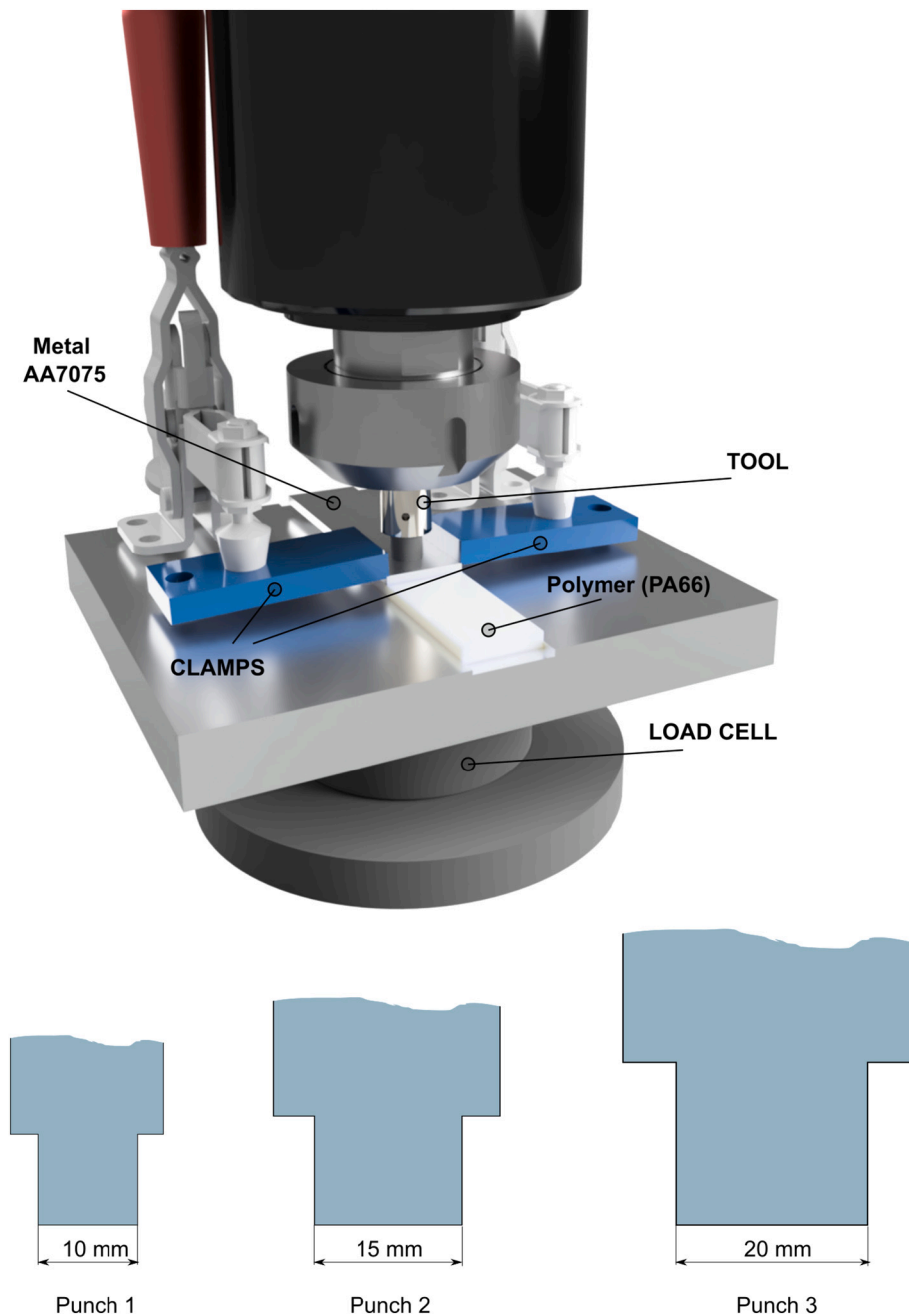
Schematic of the equipment used to produce FAJ joints and main dimension of the tools adopted.
